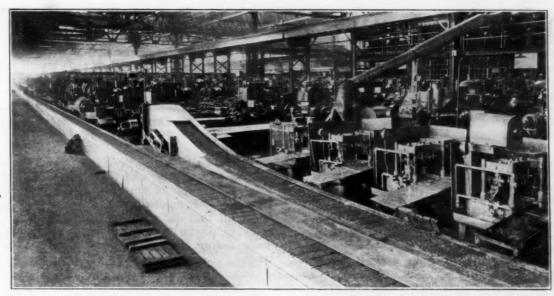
GENERAL VIEW OF THE CYLINDER MACHINE SHOP
